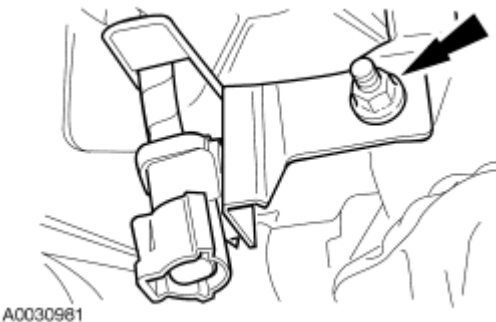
Locating Catalyst Monitor Sensor Electrical Connector Bracket Nut
